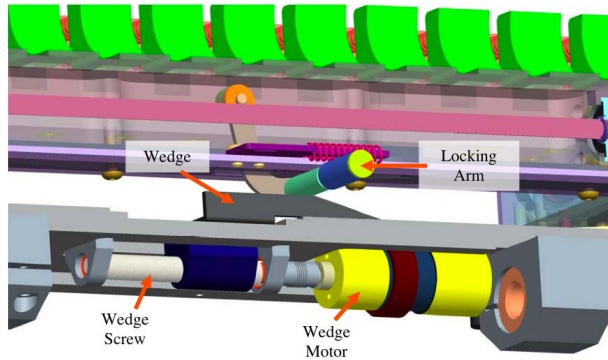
The wedge pushes a lever on the bottom of the clamp to unlock the clamp from the cart.
